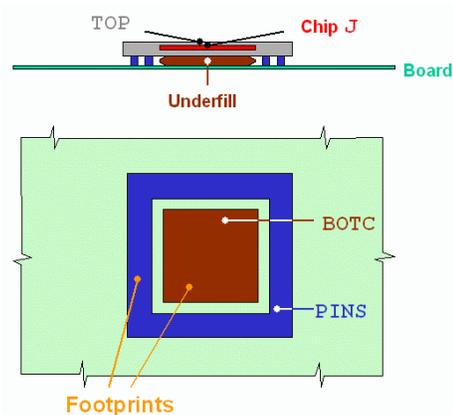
Footprint geometry of the PGA package shown in Figure 13
